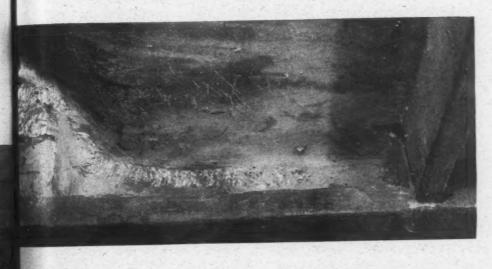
Bronze repair weld of crack shown in Fig. 16.
